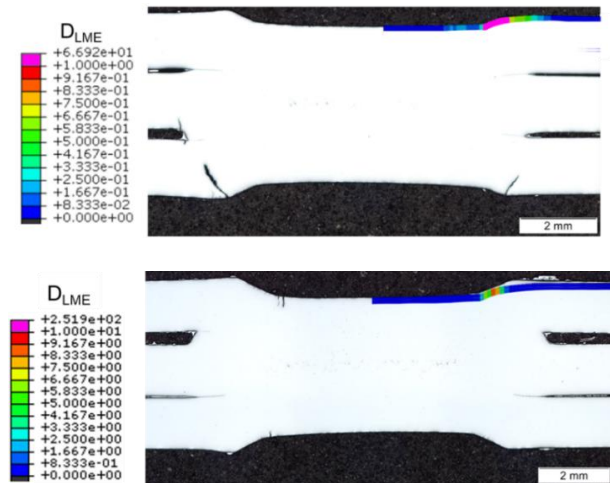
Cross-section of a weld spot made with standard electrode caps (top) and with K-electrode caps (bottom); in the top case, cracks are clearly visible in the weld metal, image: MCL
